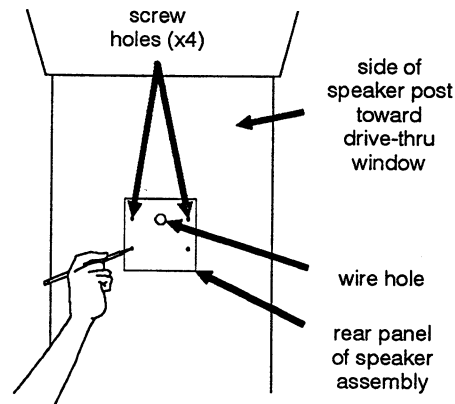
Mark speaker post through holes in rear panel of SP2500LP Speaker assembly
